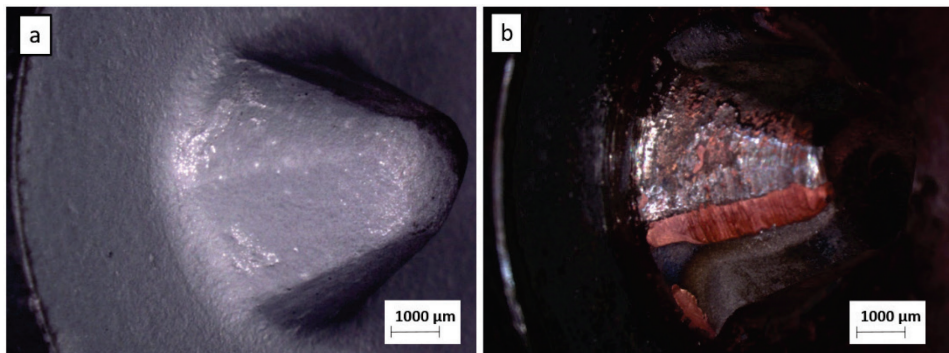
Image of the FSW tool (75TiC-NiMo) before (a) and after welding of copper (b) (adapted from Publication VI).
